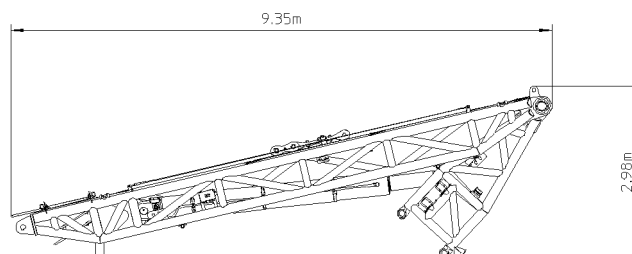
Pivot section BV suspended ballast guide (V-frame)
